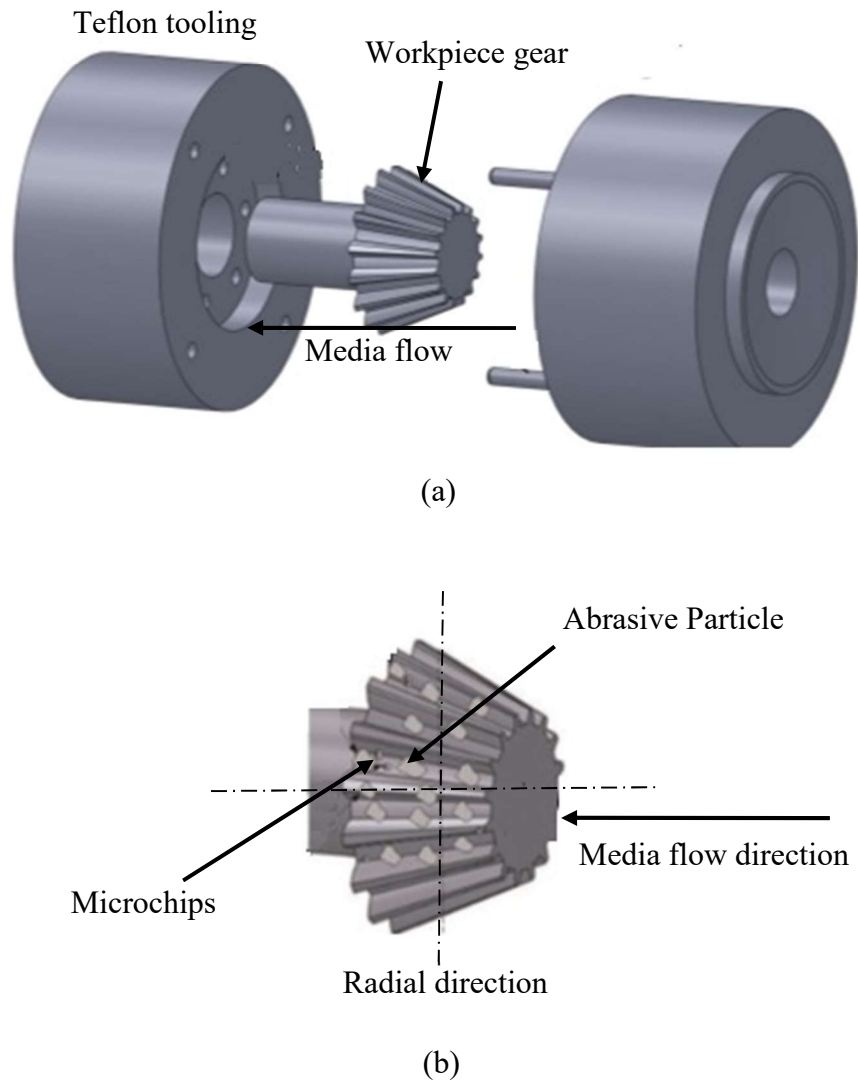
(a) Abrasive flow finishing for bevel gear and (b) schematic of a bevel gear during machining through AFM process [12]
